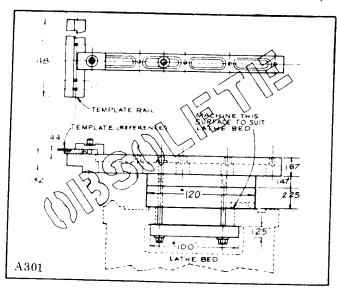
=40754 Template Rail Assembly. (Used with Early Mark II and III Series)
